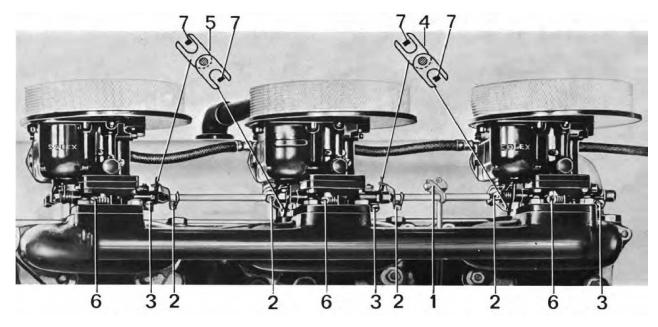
3 synchronized Solex carburetors (AQ170A,B,C)
